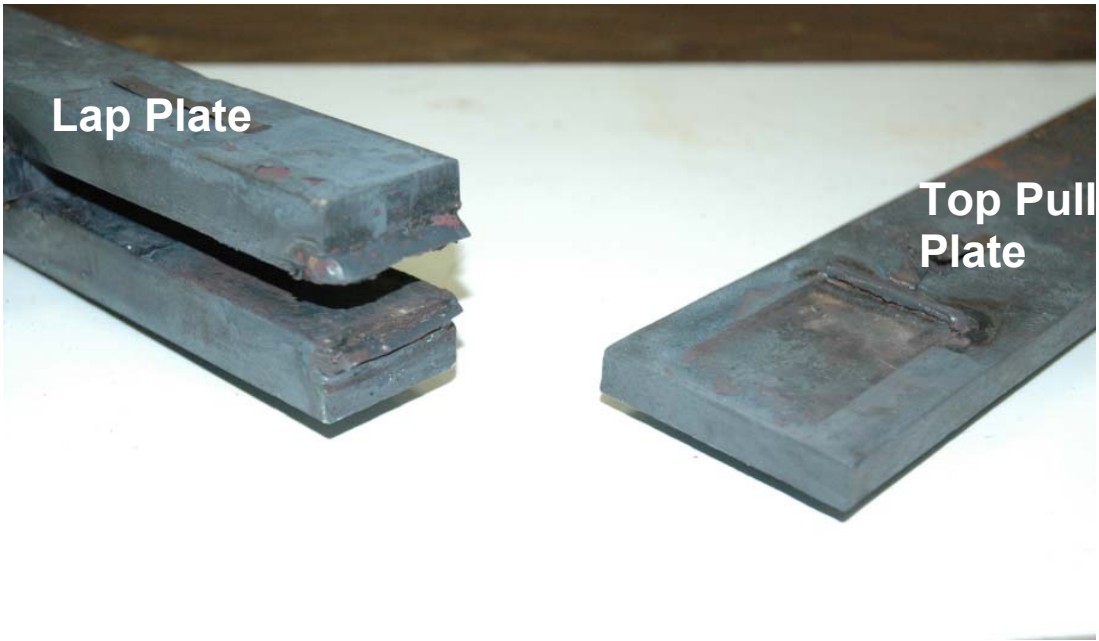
Photograph of Specimen P5 after fracture, where the weld on the lap plate and top base plate is visible
